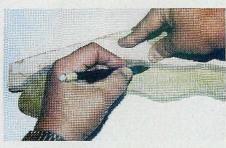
Using the taped-up underbelly assembly to draw the lower jaw's cut line.
